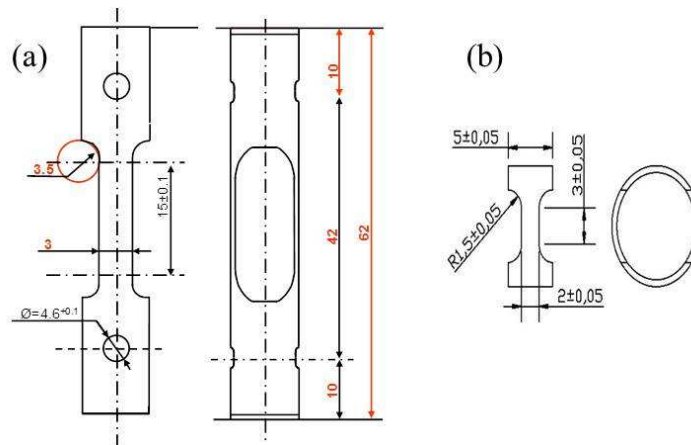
AT (a) and RTT (b) specimen geometries. Dimensions are expressed in millimeters.
